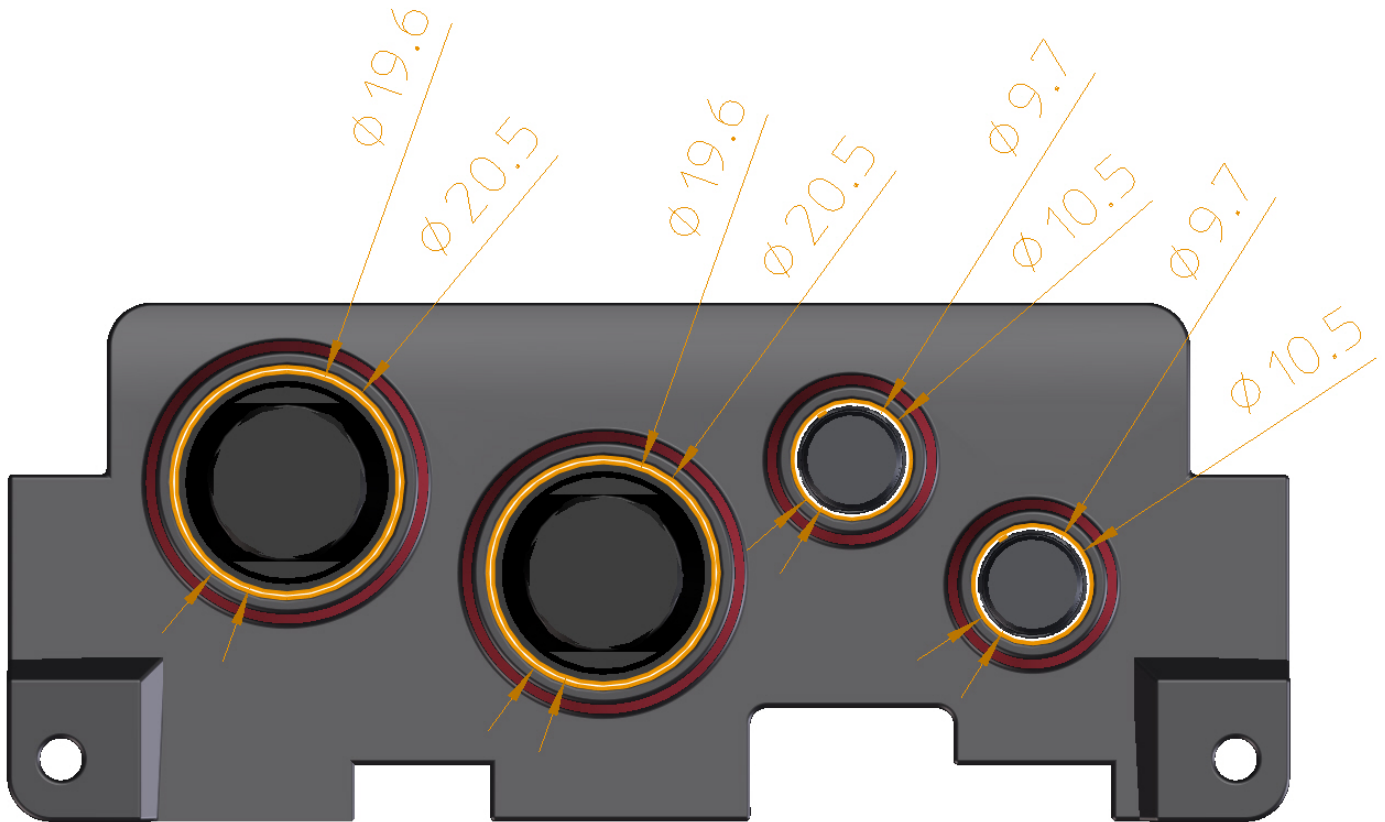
Sealing cover dimensions (mm) / Dimensions du couvercle de scellage (mm)
